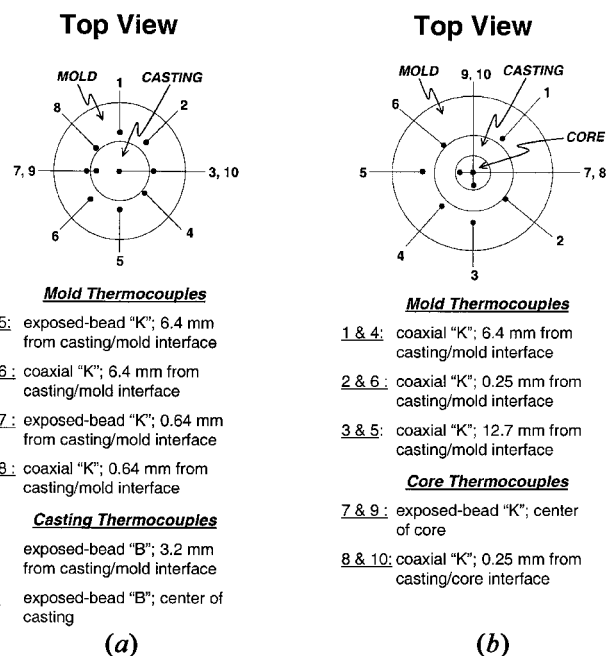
Mold schematic illustrations showing thermocouple types and locations for casting experiments: (a) shrink-off mold and (b) shrink-on mold.
